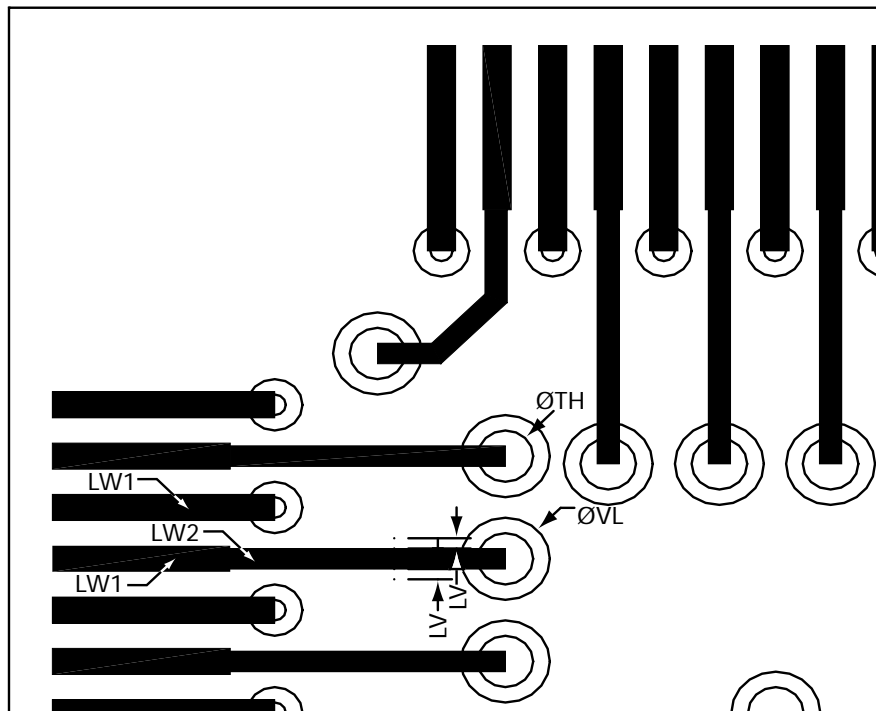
Suggested Board Layout of Soldered Pads for QFN Packages (PCB Bottom Layer), Reduced Thermal Pad
